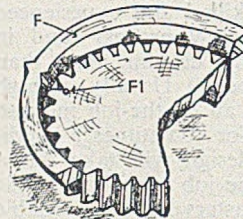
Flat-back Gear-wheel Pattern Component, made  $\frac{3}{8}$  in. deeper than the Finished Castings.
